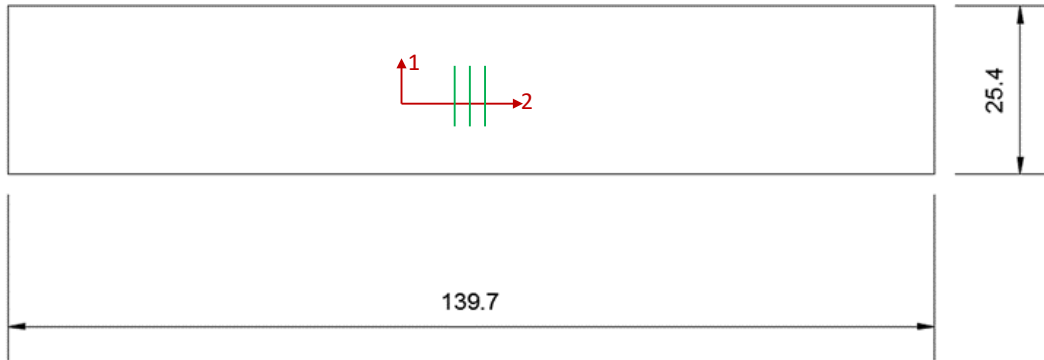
Typical specimen geometry and layout (all dimensions in mm).
